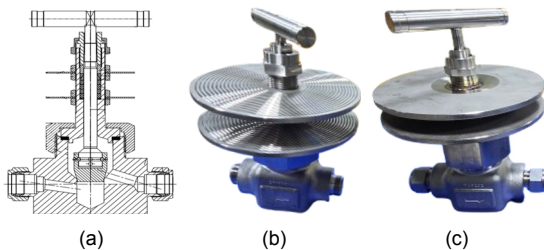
Detail drawings and prototypes of compact-type needle valve. (a) Detail drawings, (b) prototype with grooved heat sink, and (c) prototype with thick heat sink
